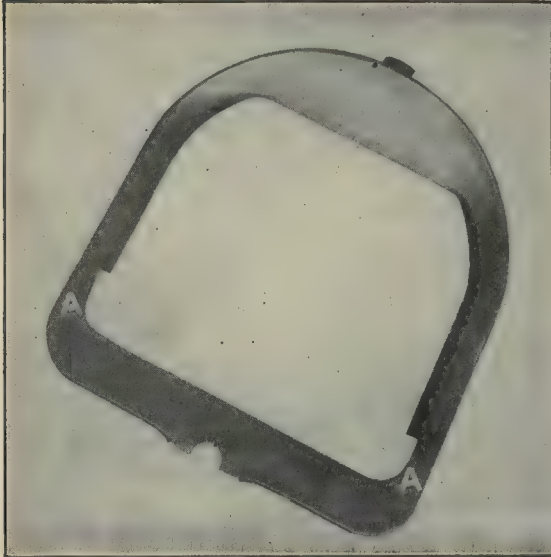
THE SPOT-WELDED RADIATOR CASING
